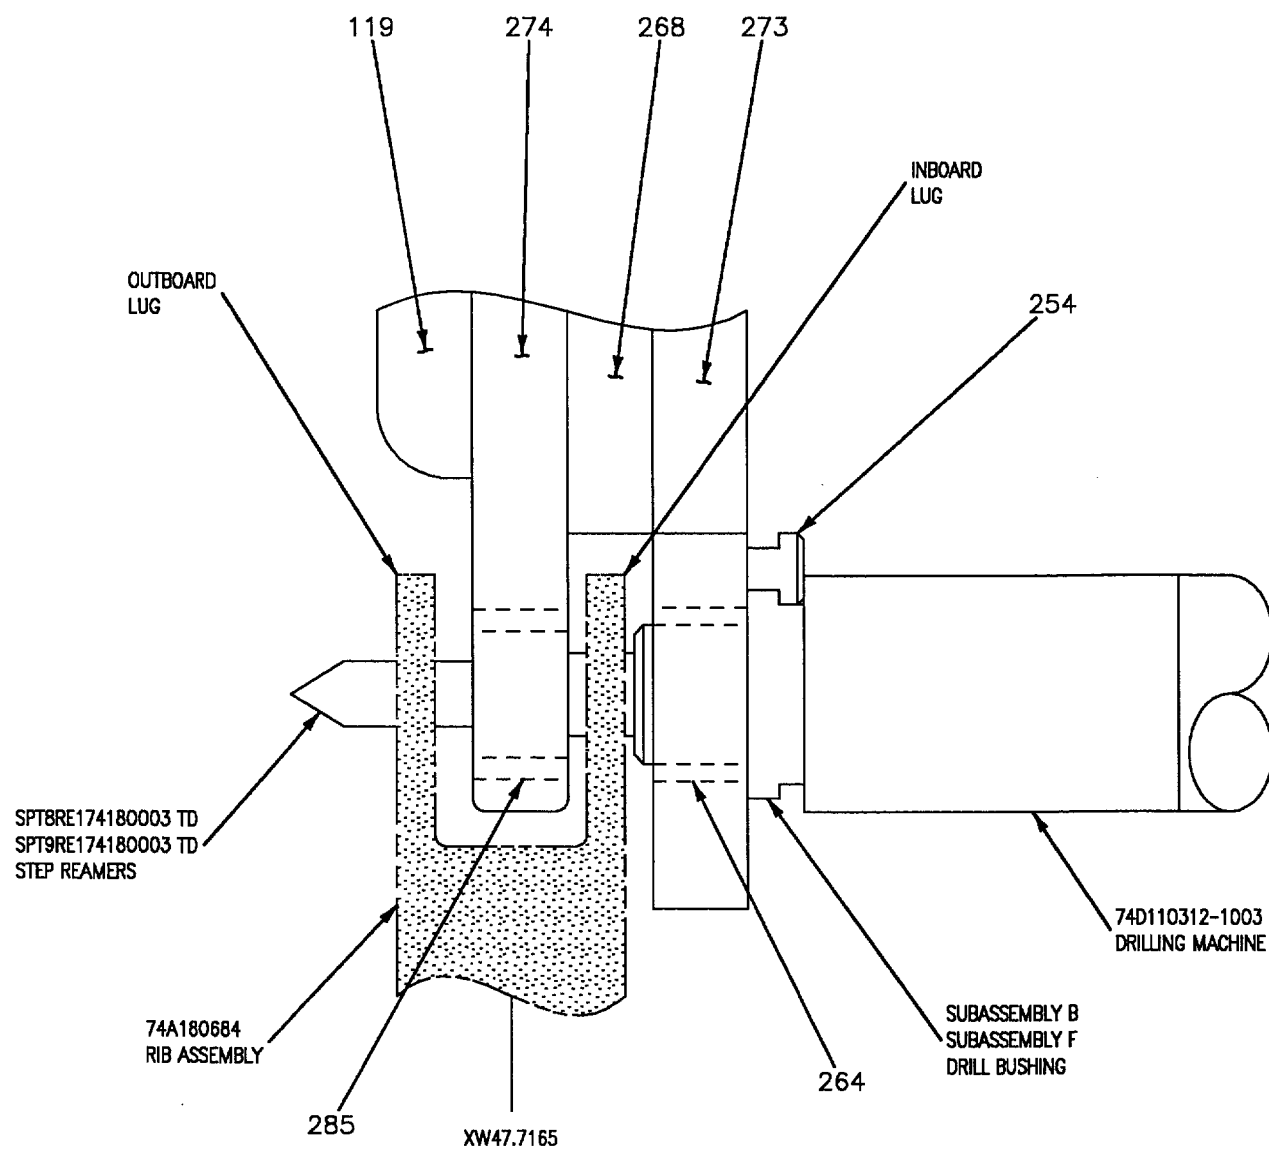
Bushing Replacement At 74A180684 Rib Assembly (Sheet 2)
